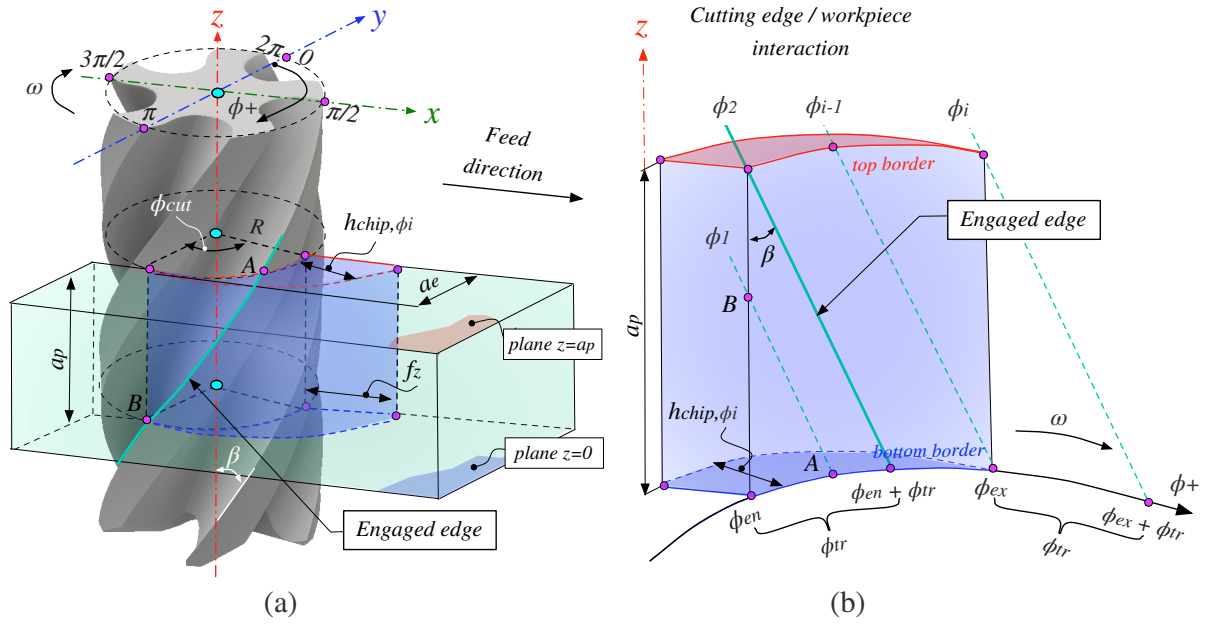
Schematic representation of: (a) side milling performed with end mill : a_p - axial cutting depth; a_e - radial cutting depth; h_{chip,ϕ_i} - instantaneous chip thickness; f_z - feed per tooth; R - tool radius; β - tool helix angle; ω - tool rotation direction; ϕ_{cut} - edge engagement angle; (b) edge/workpiece interaction phases: ϕ_{en} - edge enter angle; ϕ_{tr} - tool transient angle; ϕ_{ex} - edge exit angle; ϕ_i - instantaneous tool angular position; AB - instantaneous length of cutting edge engaged into workpiece
